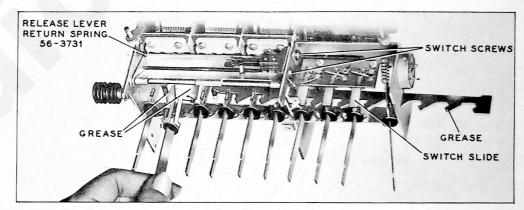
REMOVING STATION-SELECTOR PUSH ROD
